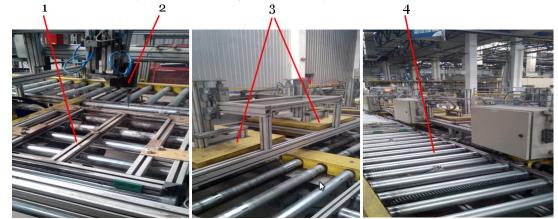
Oven door assembly line through gluing. 1-support for assembly and transport rollers to the polymerization ovens of the oven doors; 2- dispersion hose; 3-polymerization ovens; 4-conveyor rollers.
